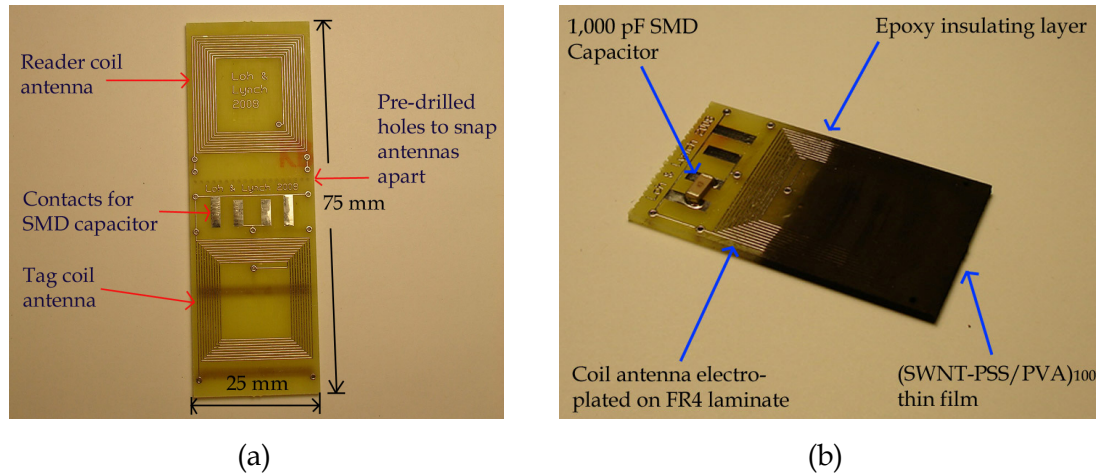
A schematic illustrating the design and fabrication of the Generation-III PCB passive wireless sensor.
